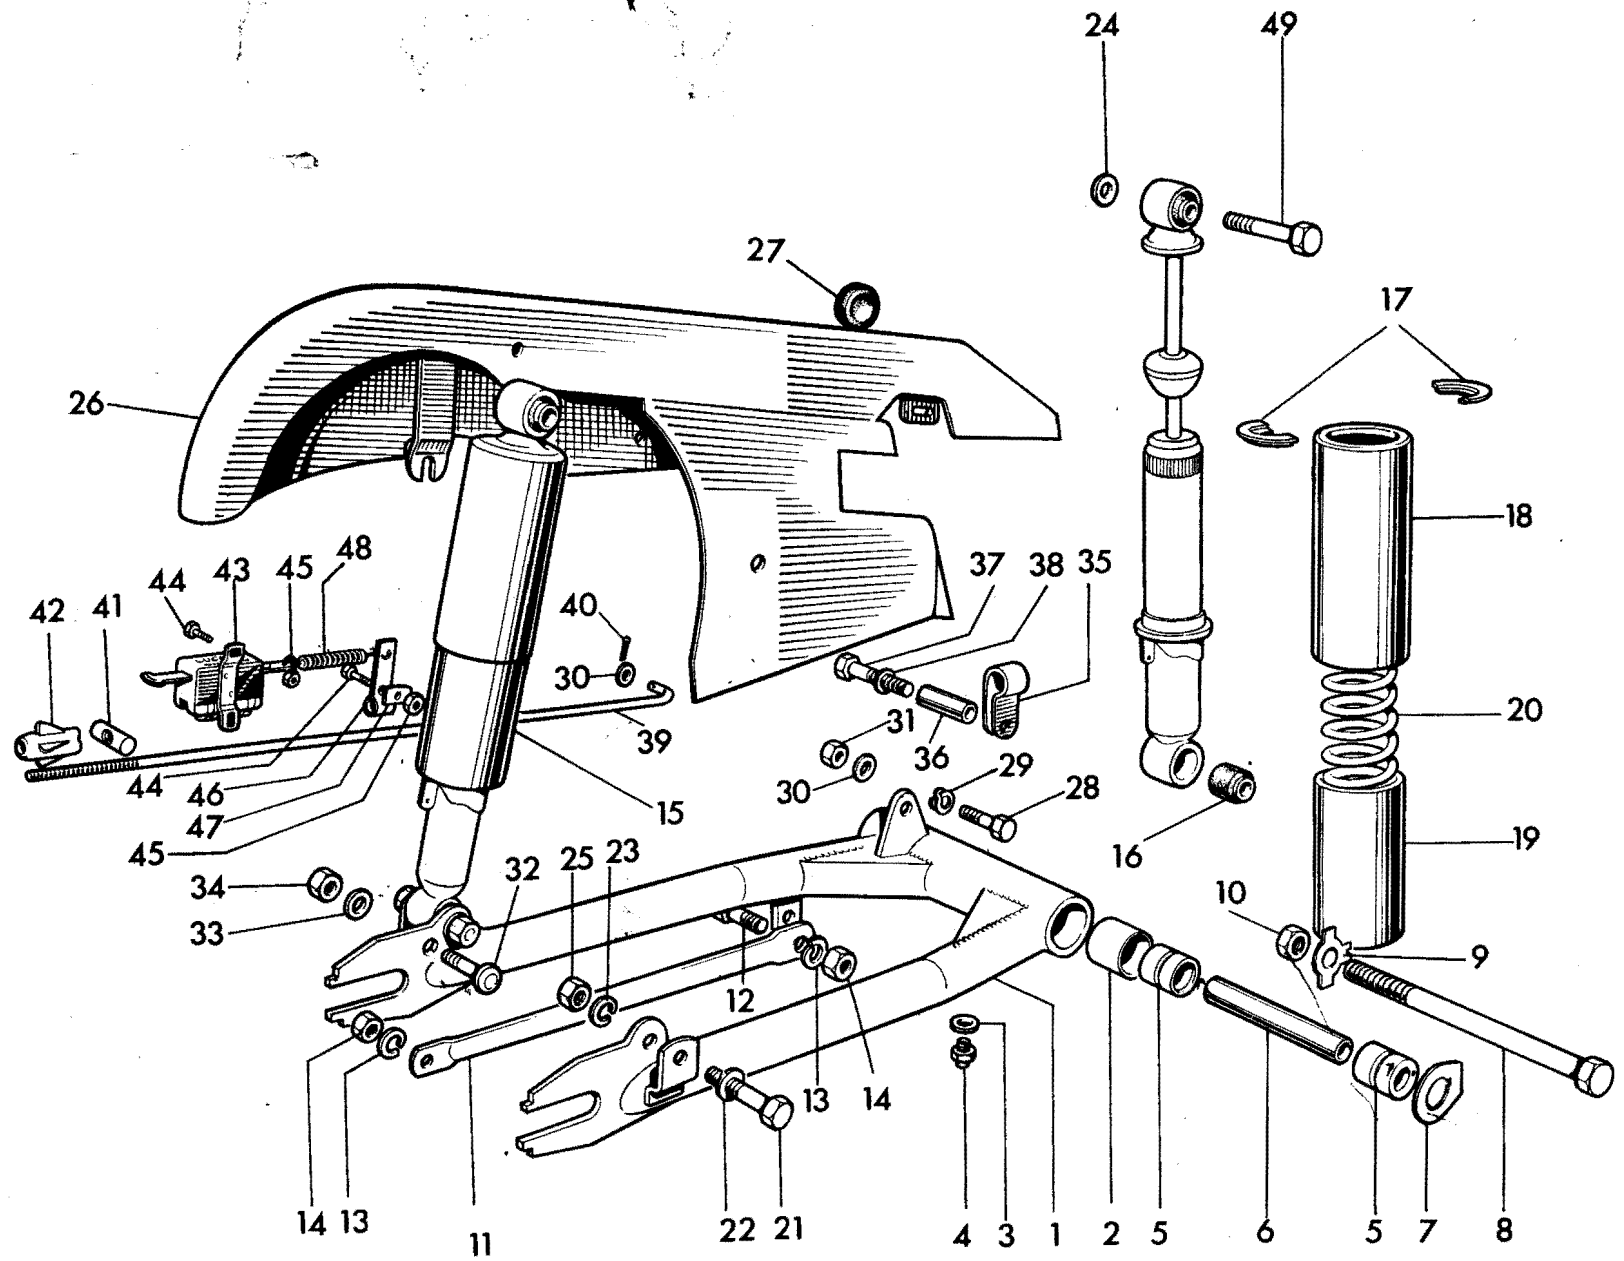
SWINGING FORK AND SUSPENSION UNITS
